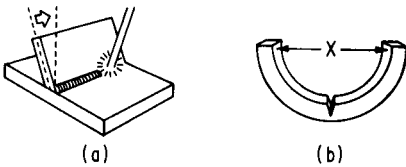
Using shrinkage forces to advantage: (a) by inclining a plate before welding, (b) by spacing parts.
